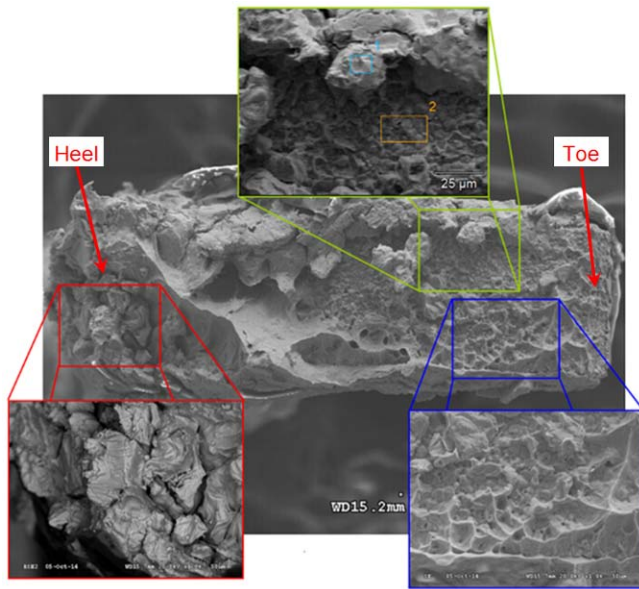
Fracture surface of QFP solder joint with SAC305 on High T_g board after 6010 cycles
